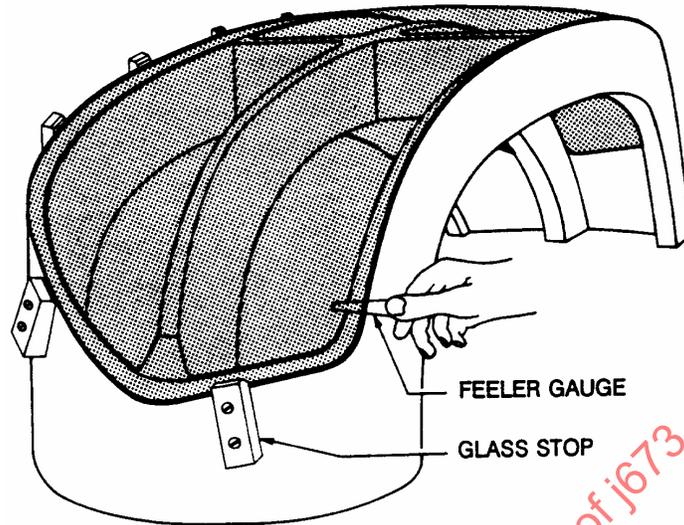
CONVEX-TYPE CHECKING GAUGE
